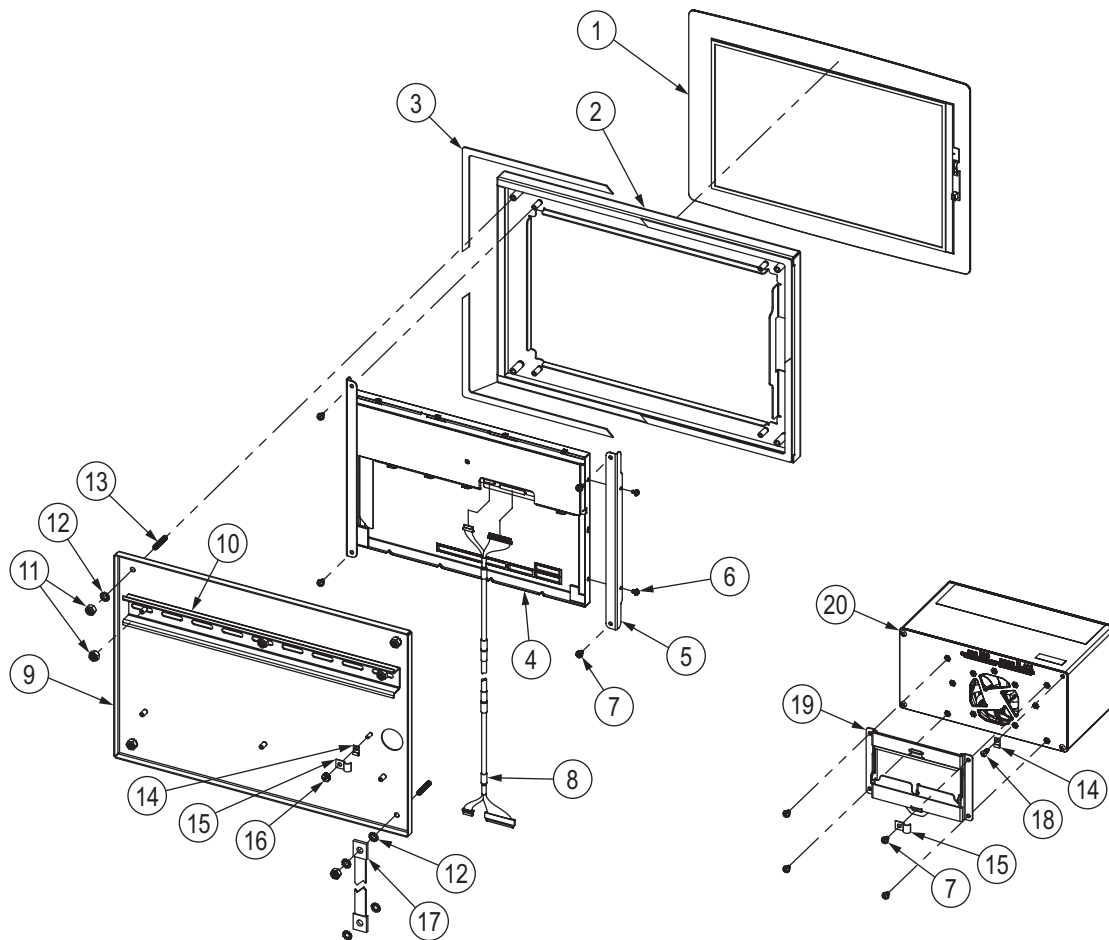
12" Touch-Only Panel Mount Repair Parts
